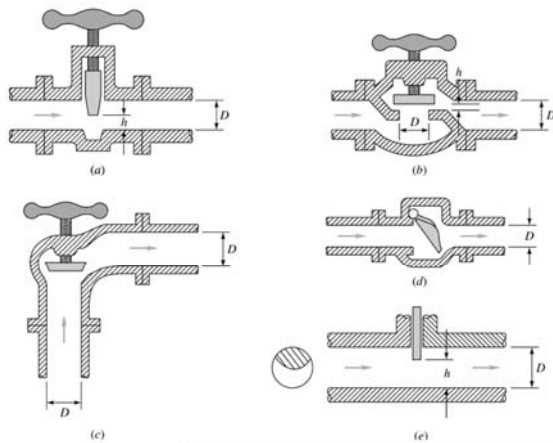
Typical commercial valve geometries: (a) gate valve; (b) globe valve; (c) angle valve; (d) swing-check valve; (e) disk-type gate valve.
